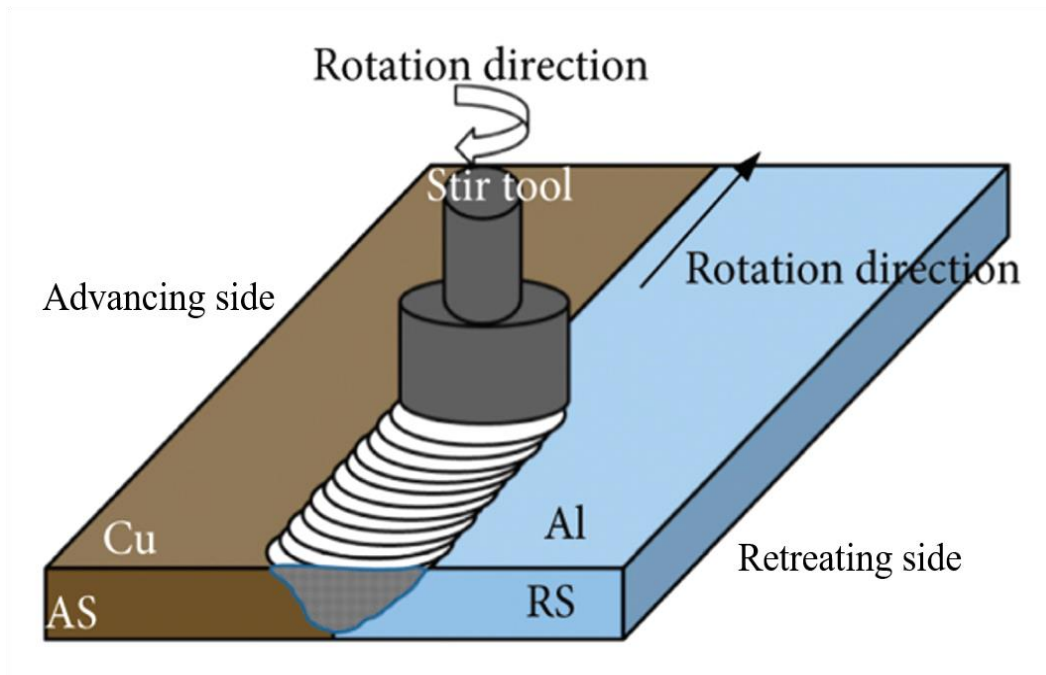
Schematic illustration of dissimilar butt welding using FSW process [149]
